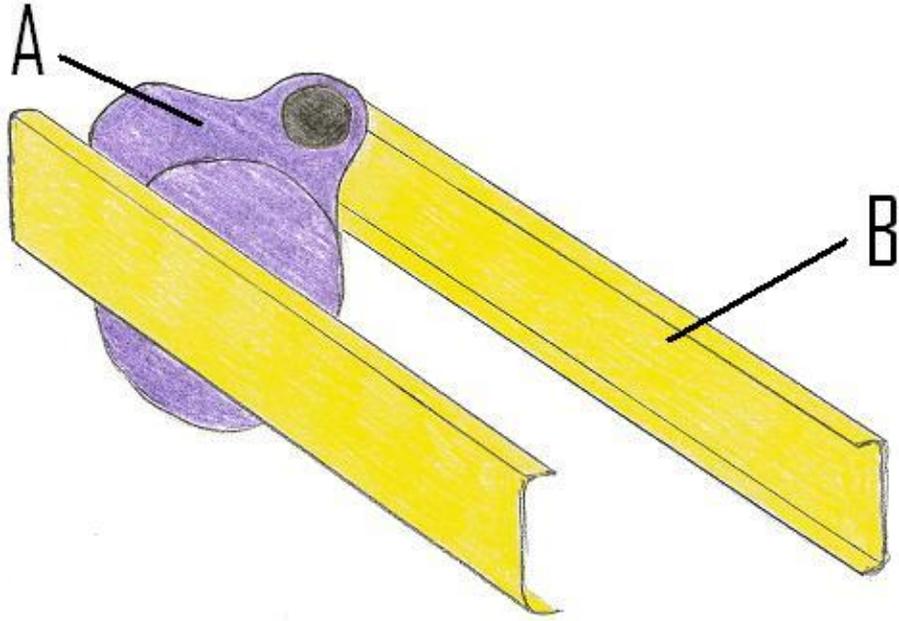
Schematic drawing of the flywheel housing and the frame sides.
